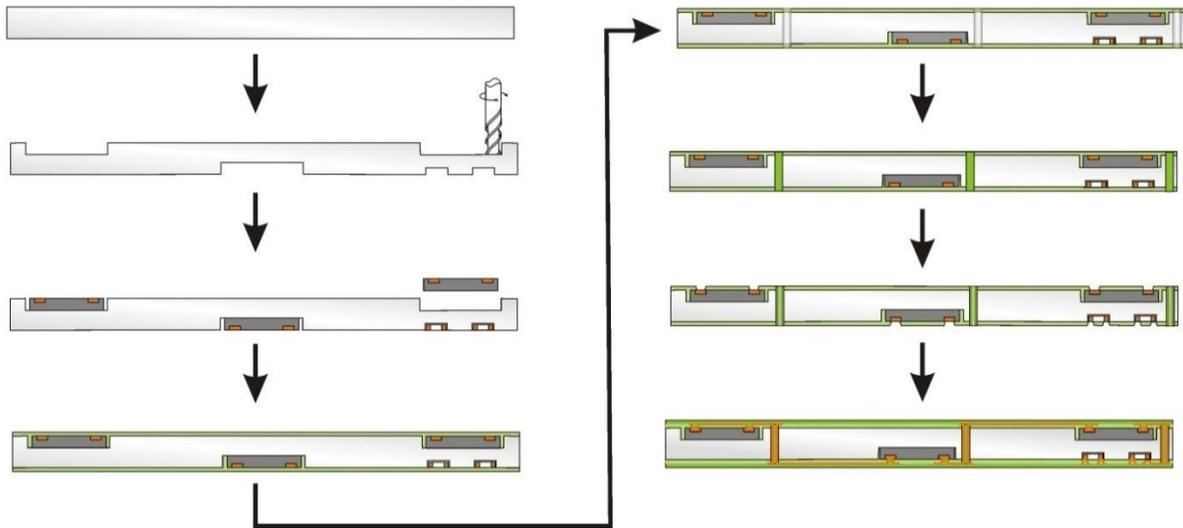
The basic process steps for double sided aluminum circuit assembled and interconnected without solder are illustrated. From the top left, aluminum material is provisioned with cavities by milling (as illustrated), etching or embossing, wherein components are placed and then coated with an insulating material. Holes are drilled and then filled with insulating material, the re-drilled. At the same time vias are formed to access component terminations. The circuit pattern is then plated and circuits sealed after last layer is complete leaving open feature required for interconnection and power (open features not illustrated). The metal core can serve both as heat spreader and power or ground layer.
